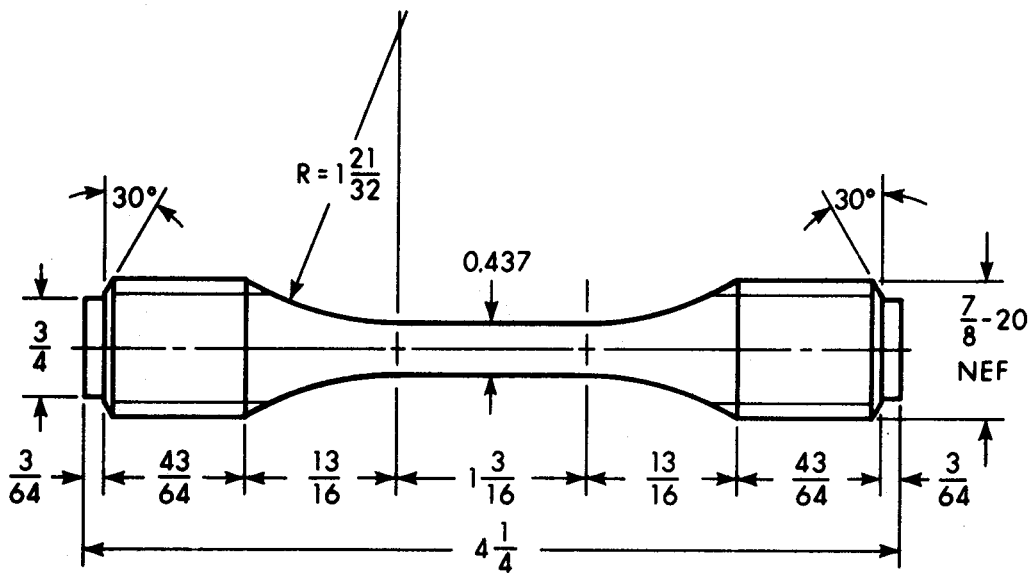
MACHINED POLISHED SPECIMEN
